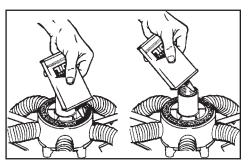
Lubricate Vacuum Seal on Top of Hub
